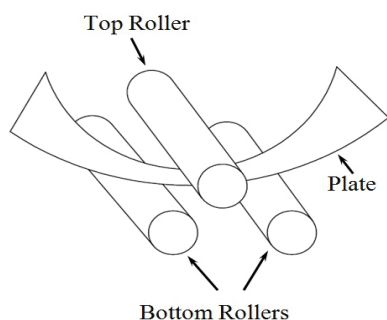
Schematic Diagram of 3-roller cone frustum bending
